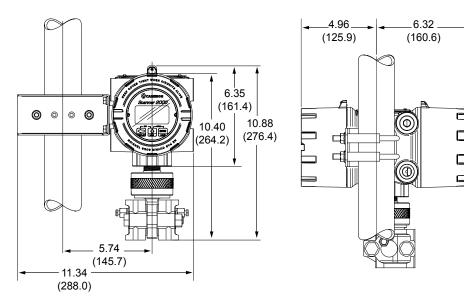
Scanner 2100 (wired) with hardware options; dimensions in inches (mm); for dimensions with antenna, see Figure 2.4, page 31.
